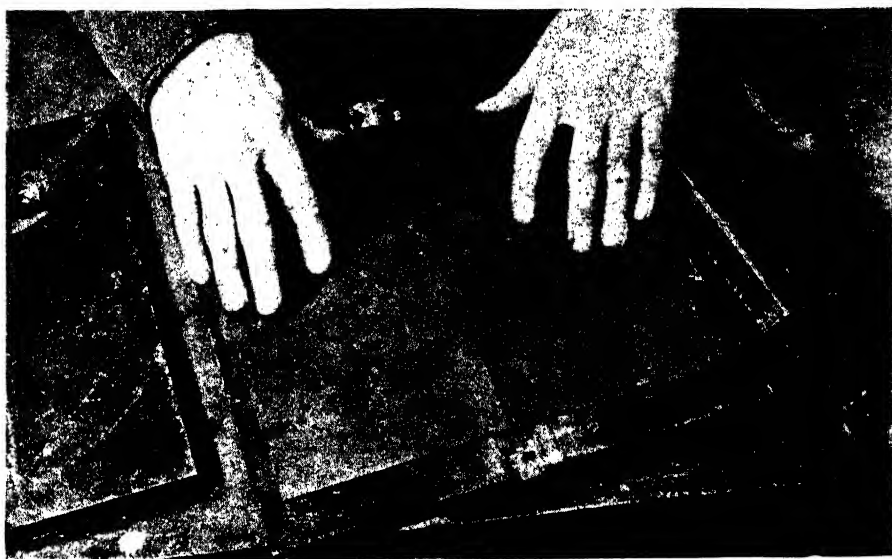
JIG FOR SHEET METAL BUTT WELD BEING ASSEMBLED
